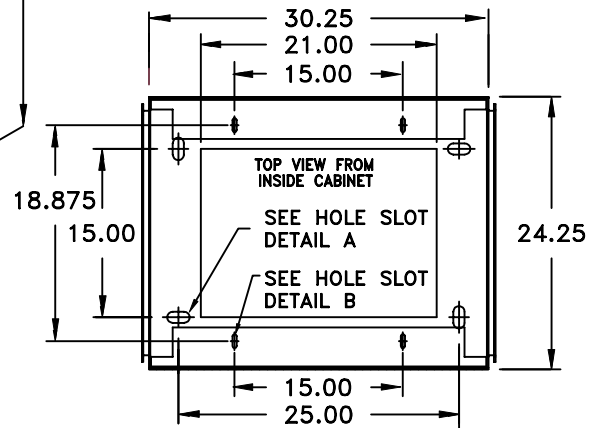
DETAIL B CABINET HOUSINGS FLANGE AROUND DOOR OPENING
